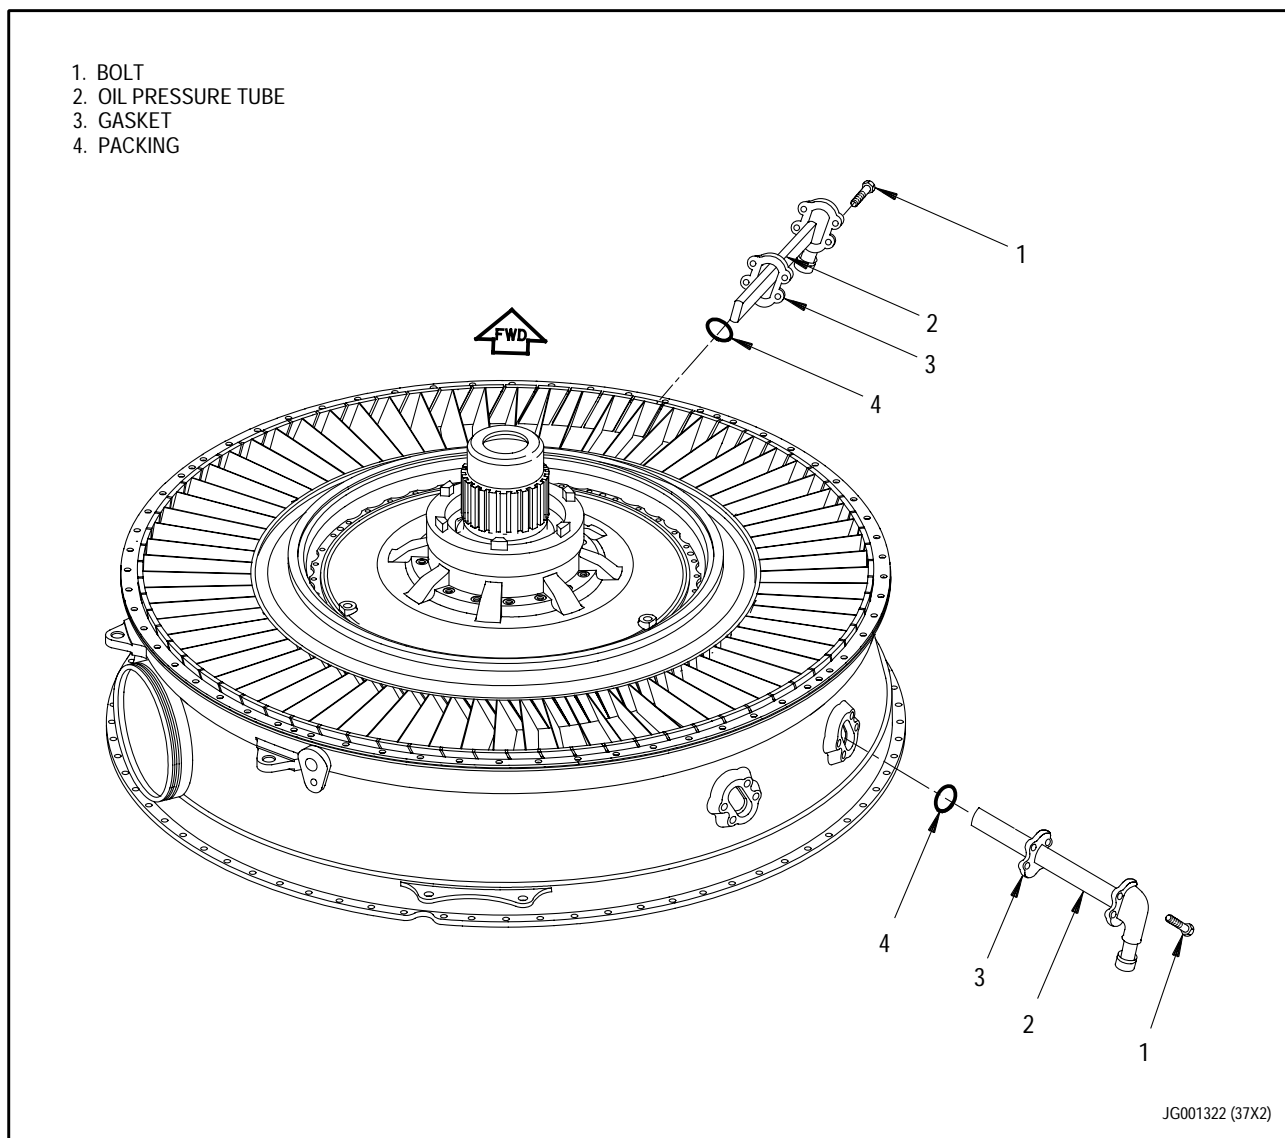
No. 2 and 3 Bearing Internal Oil Pressure Tubes - Removal
